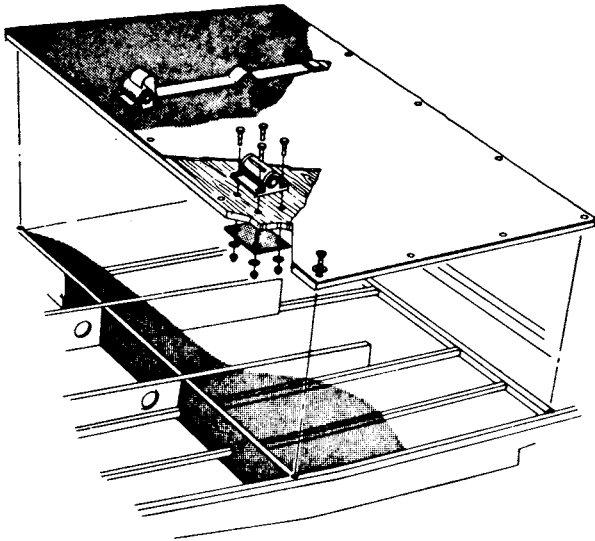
Typical floor mounted inertia reel installation.
